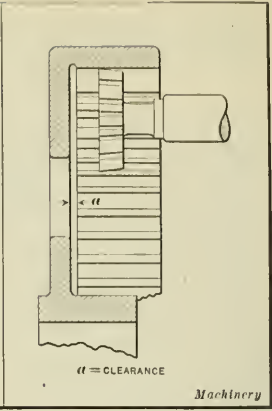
Internal Spur Gear out with Fellows Gear Shaper
